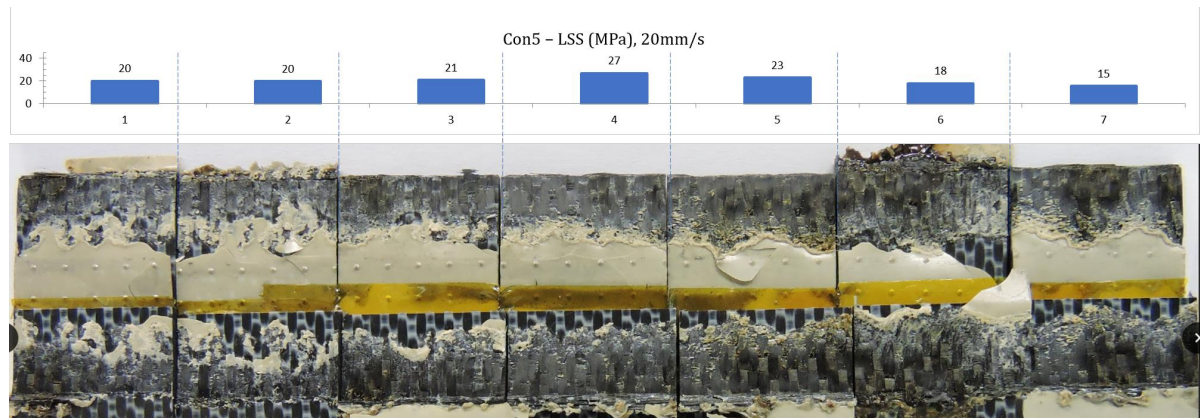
The fracture surfaces at a welding speed of 20mm/s
